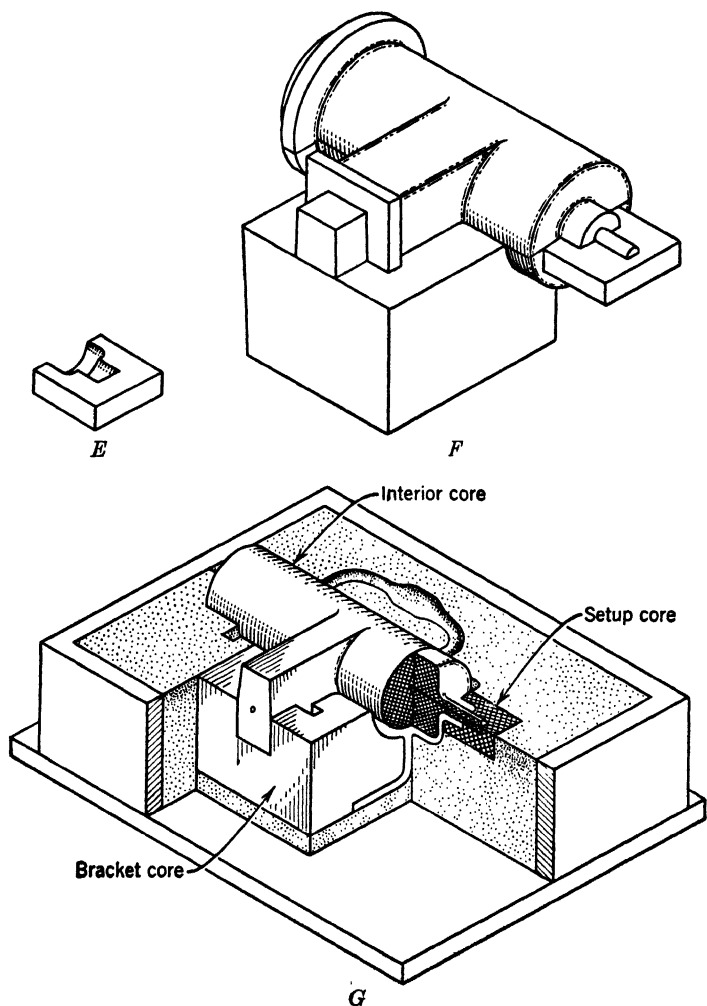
E.* Setup core. *F.* Pattern. *G.* Sectional view of completed drag.
